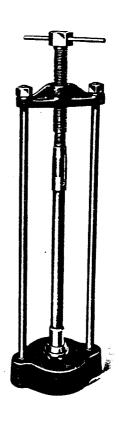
FT.36A STEERING COLUMN BEARING INNER CONE REMOVER.
